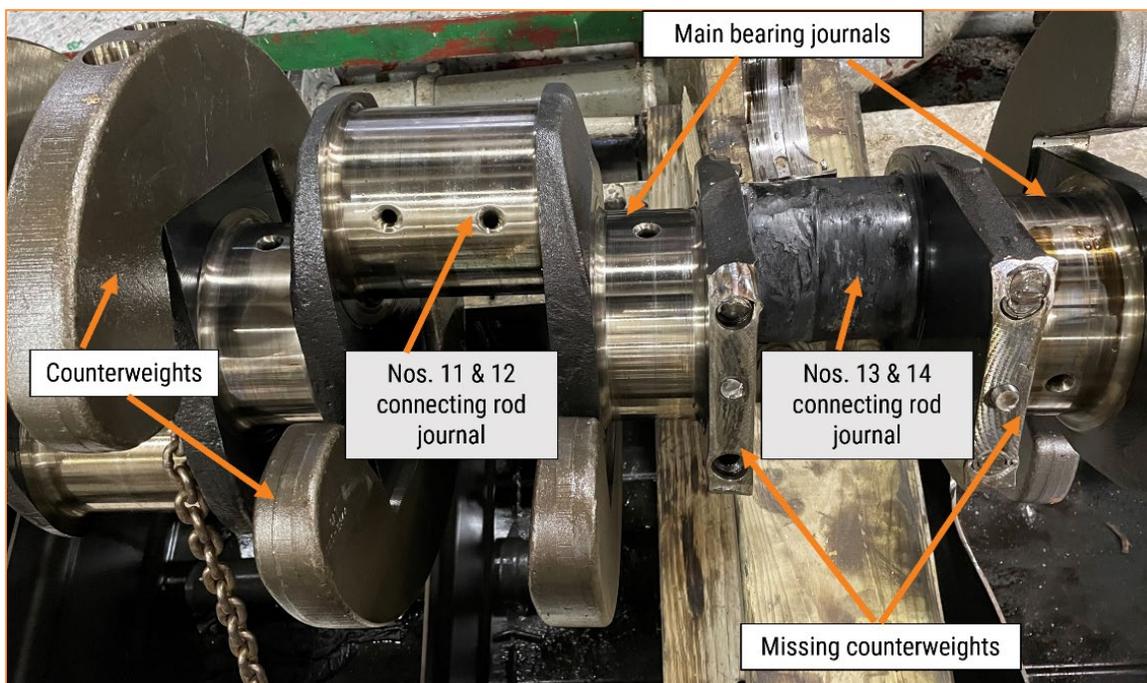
Removed crankshaft from damaged no. 2 auxiliary generator on board *Ocean Navigator* after the engine failure.
